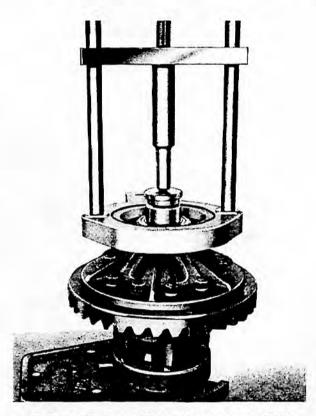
REMOVING DIFFERENTIAL BEARING CONES
